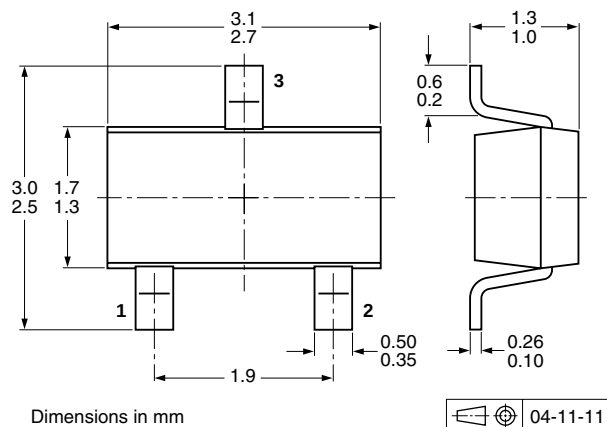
Package outline SOT346 (SC-59A/TO-236)
